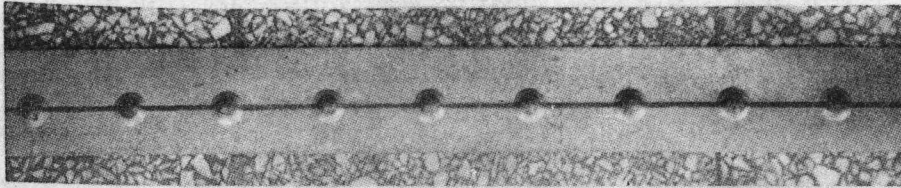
Results of cupping test to a size of 1×330×800 mm galvanized steel sheet with laser welding
